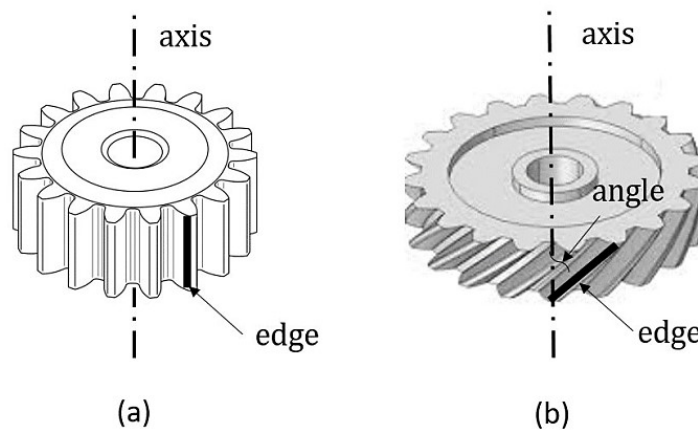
Gear tooth-based classification (a) spur gear; (b) helical gear [5].
